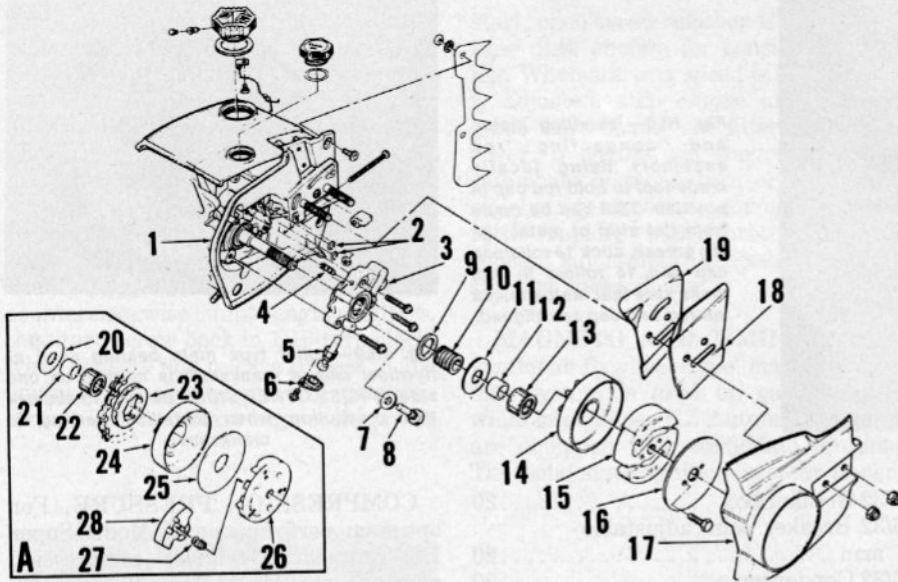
Exploded view of automatic oil pump and clutch assemblies. Inset A shows three-shoe type clutch. Sprocket (23) and clutch drum (24) are integral on some models.
